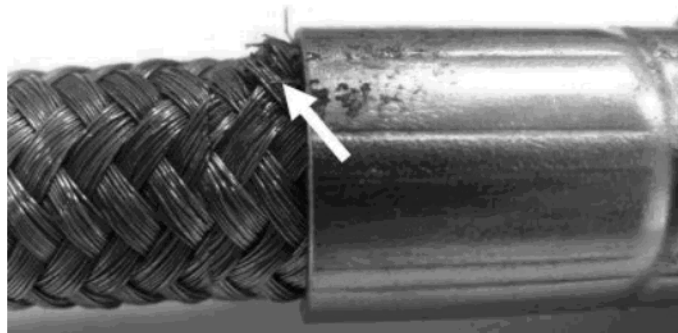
Corrosion at the braid and fitting. A pen shows where a leak is located.
